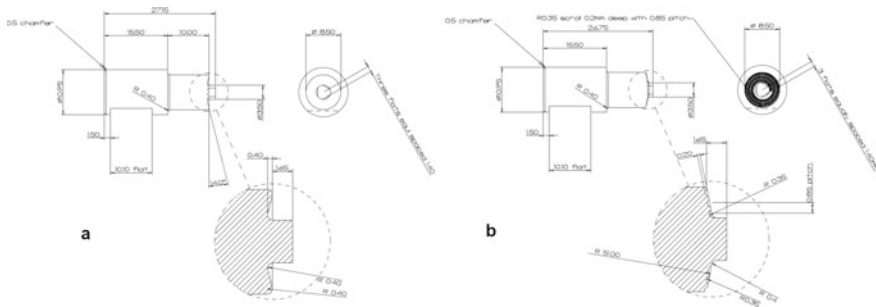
FSW pin tool designs and dimensions, a cup shoulder design, b scroll-convex shoulder design
